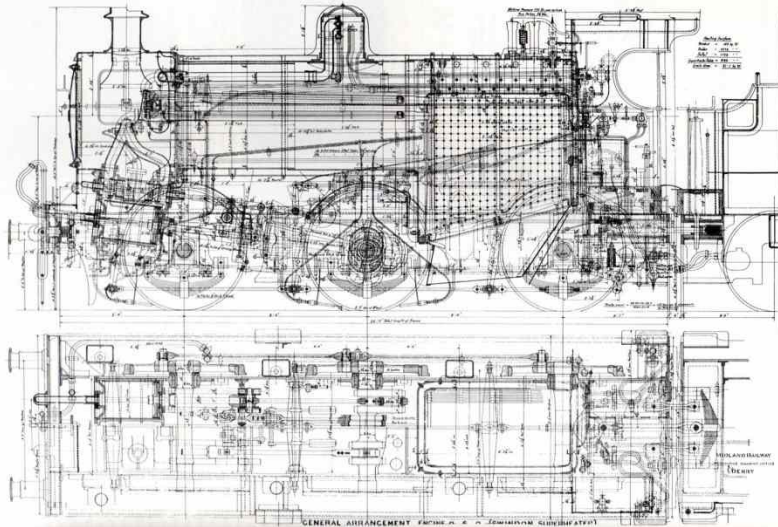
General Arrangement Drawing for 0-6-0 Goods Engine No. 3836.
